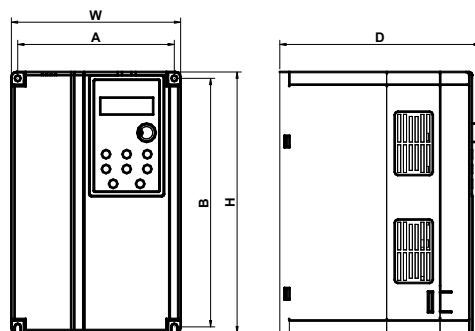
Schematic Diagram for Physical Dimensions and Mounting Dimensions (below 7.5kW)
